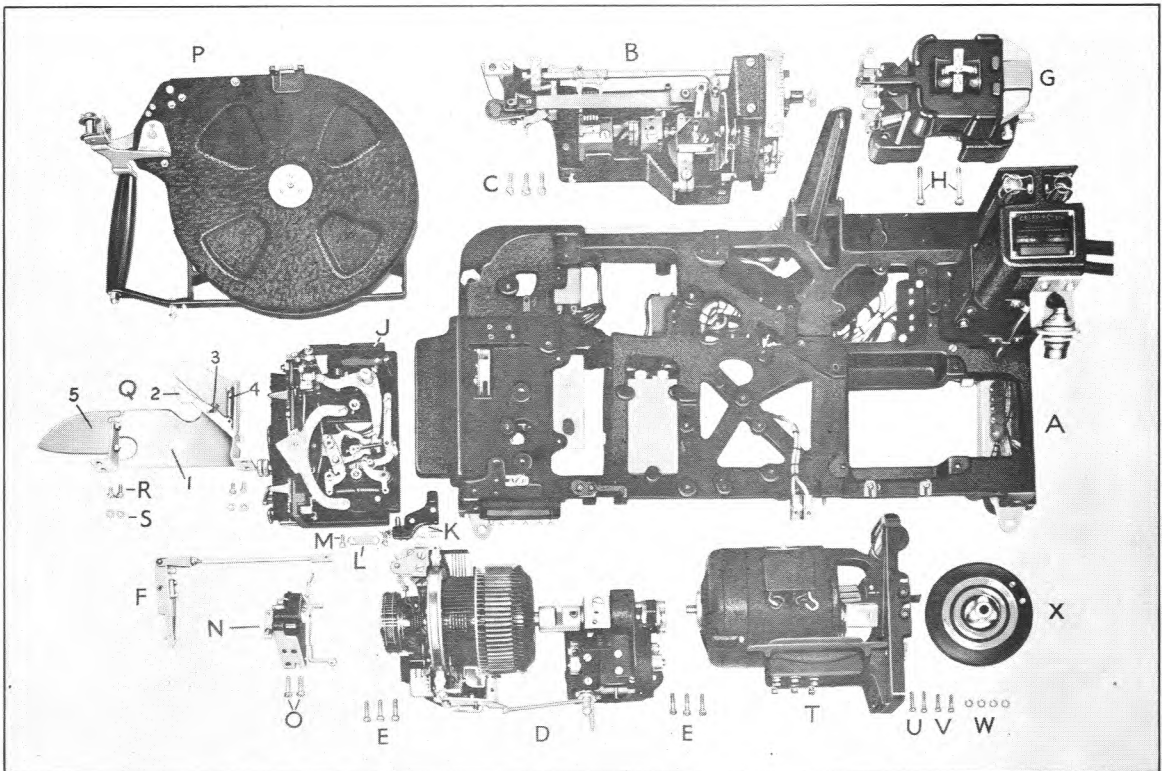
TELEPRINTER SUB ASSEMBLY COMPONENTS
